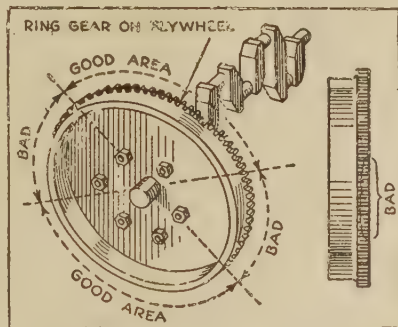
Showing how the Life of the Starter Ring on Flywheel may be prolonged.
